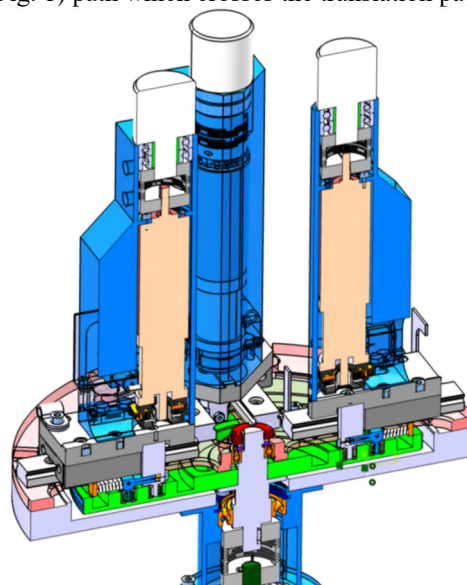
Section view of CAD V1 MAGSTAT prototype.
